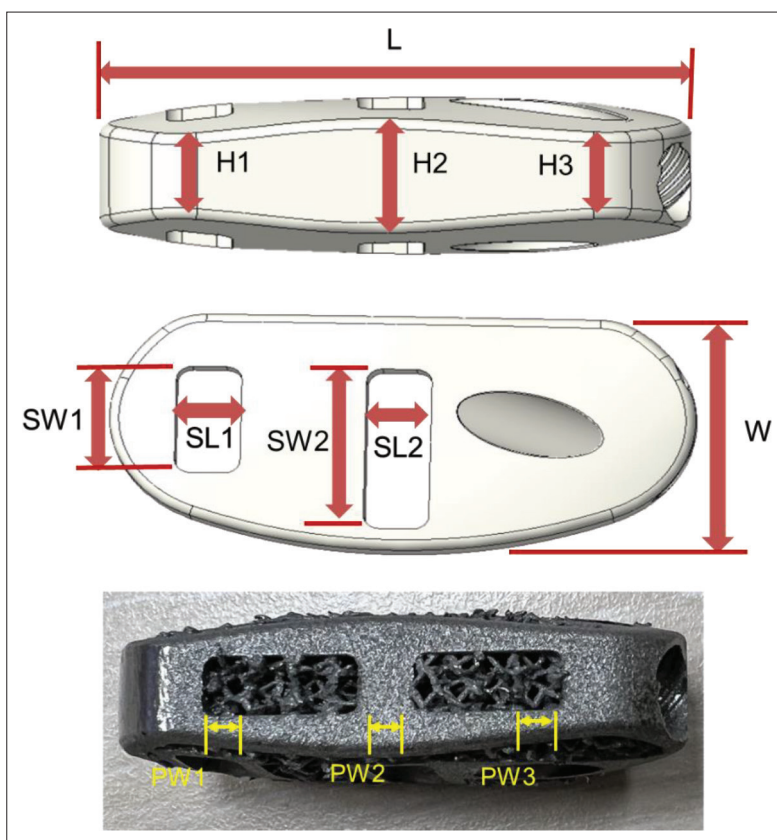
Measured point and position of 3D-printed cage dimensional accuracy and surface roughness.
